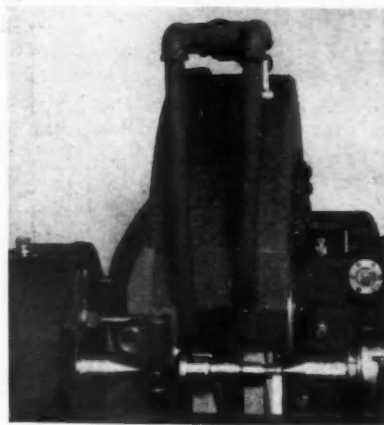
View of semi-automatic grinder for grinding stem pinions, and Fig. 2—The stem pinion is shown inserted at the lower right of the picture
